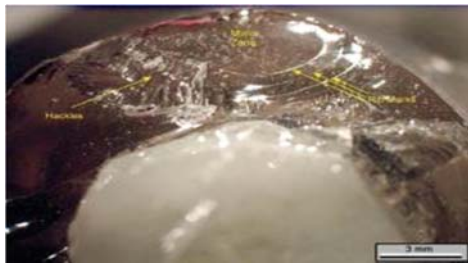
Brittle fracture of an epoxy layer displaying a mirror zone, rib marks, and hackles. [2]
